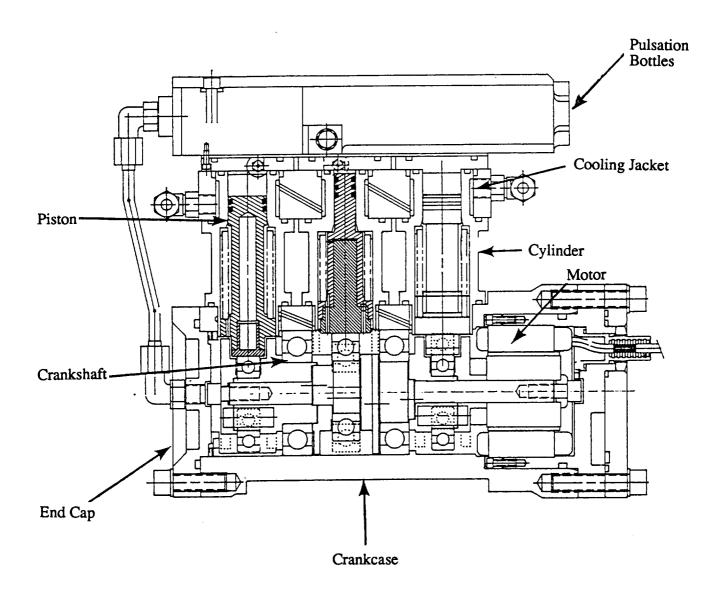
PROTOTYPE COMPRESSOR LAYOUT
